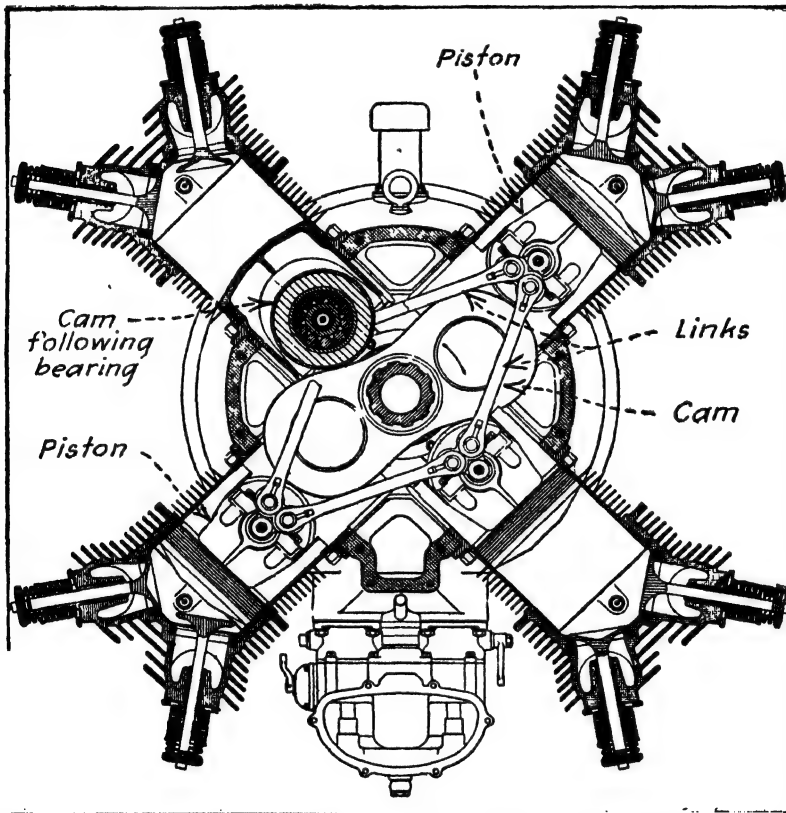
E.—Plan Section Drawing of Caminez Engine that Uses Cam Instead of Crankshaft for Operating Pistons. Note Use of Roller Bearing as Cam Follower.
